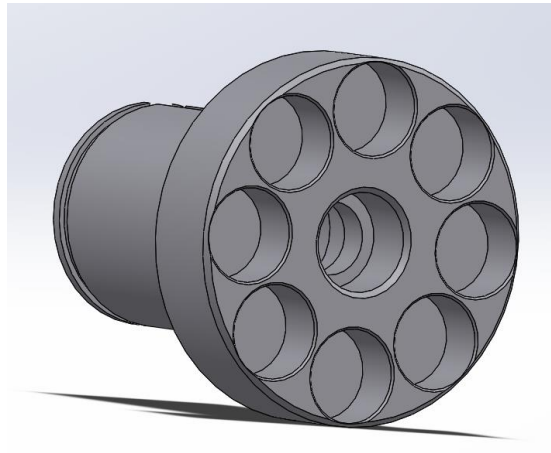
Indentations on the bottom shaft's medial end that fit over the actuator bolt pattern
